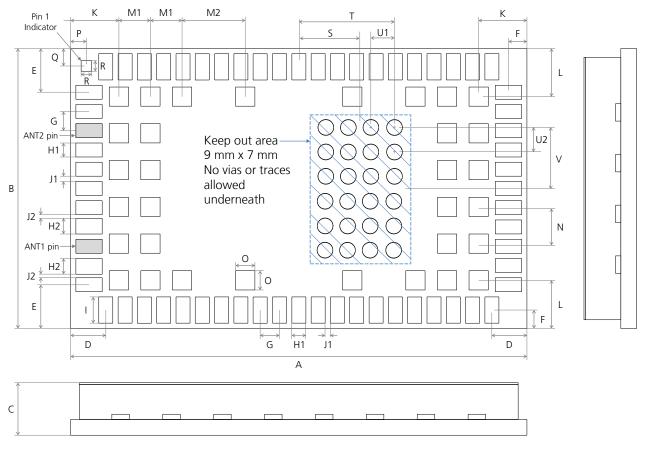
Dimensions (SARA-S200 bottom, top and side views)
